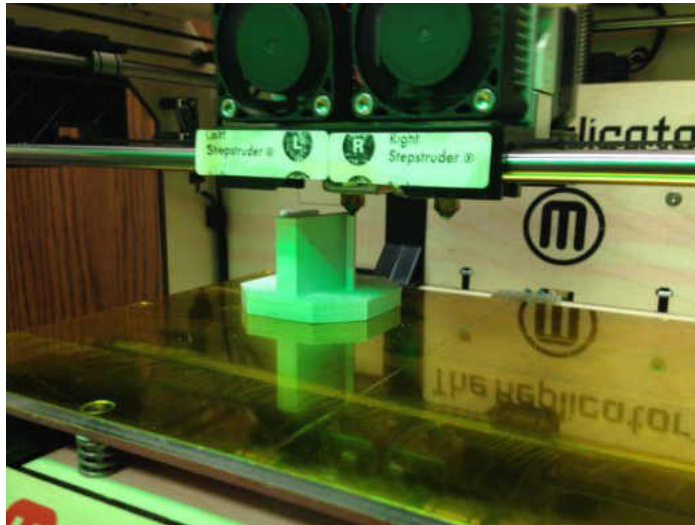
A printed part between the extruder heads of MakerBot Dual and the heated build plate.
